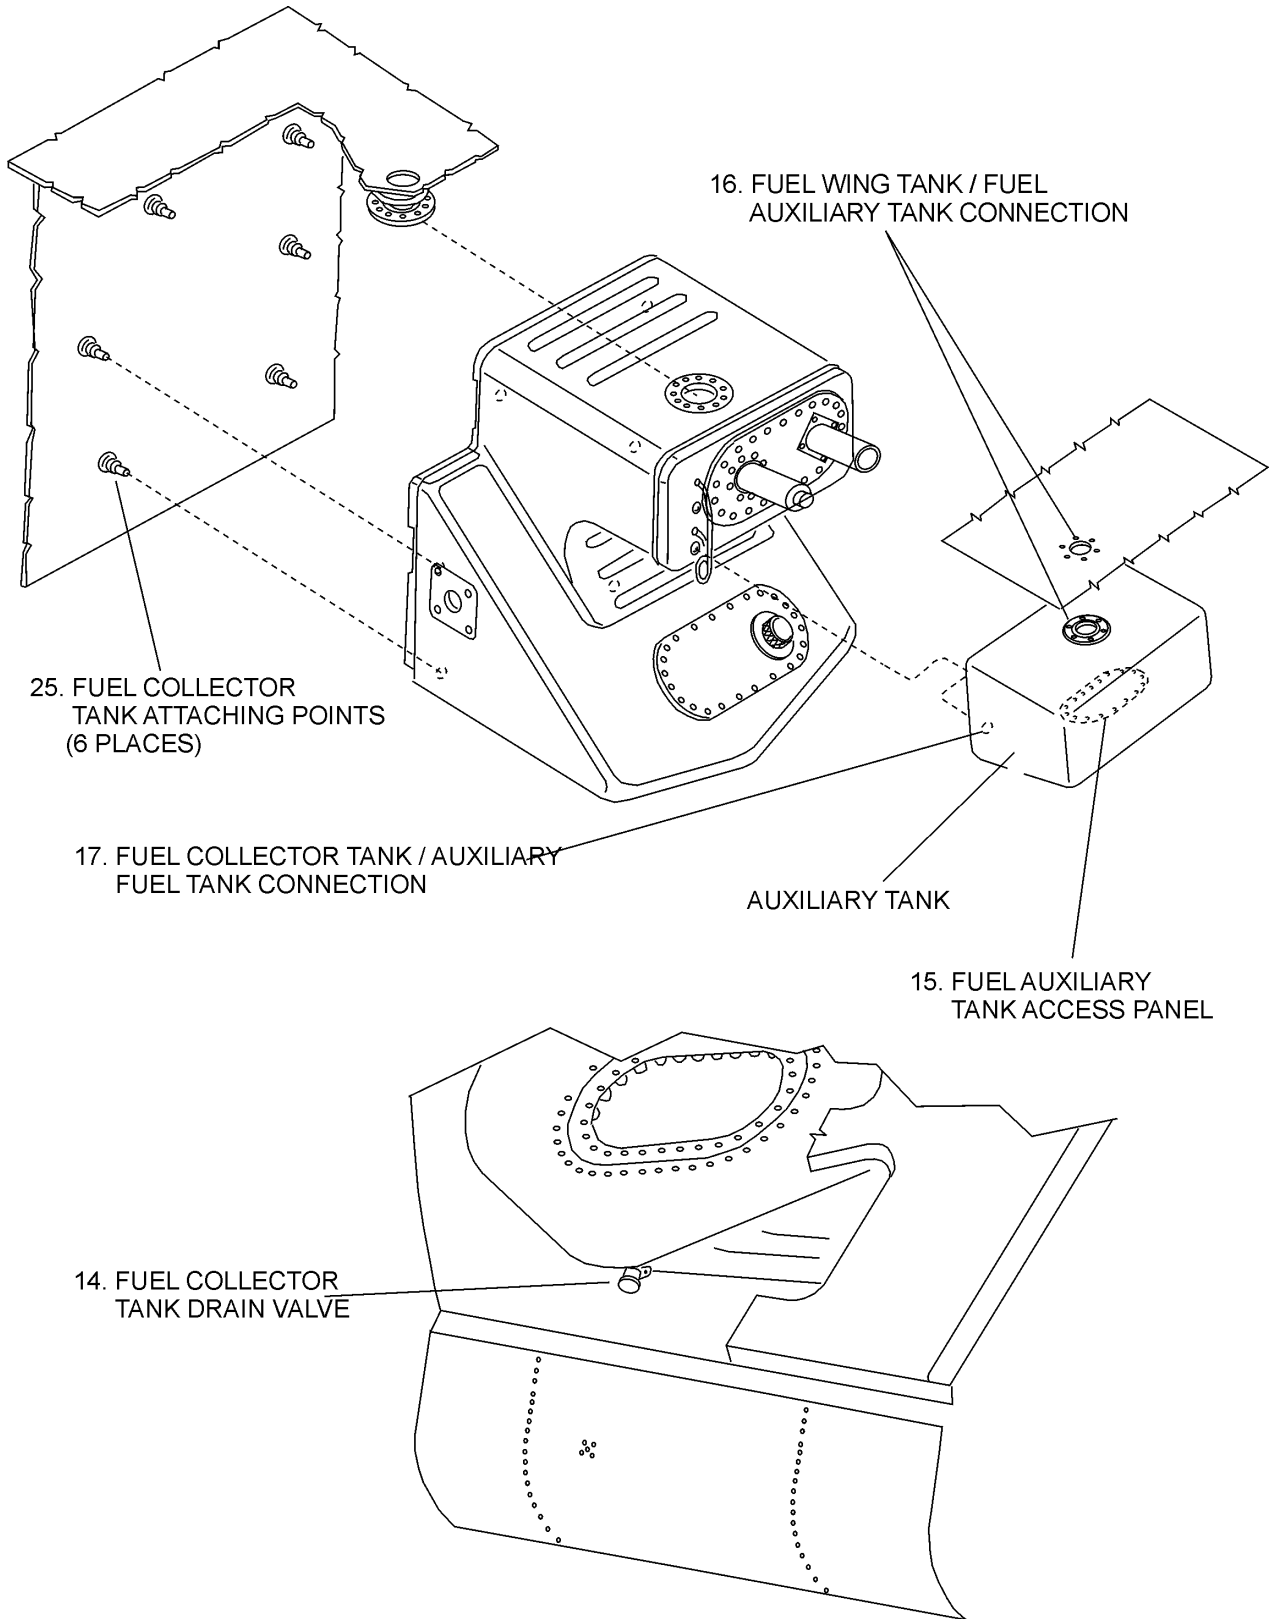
Fuel Tanks Access Panels and Components - Leakage Check (Sheet 3 of 6)
